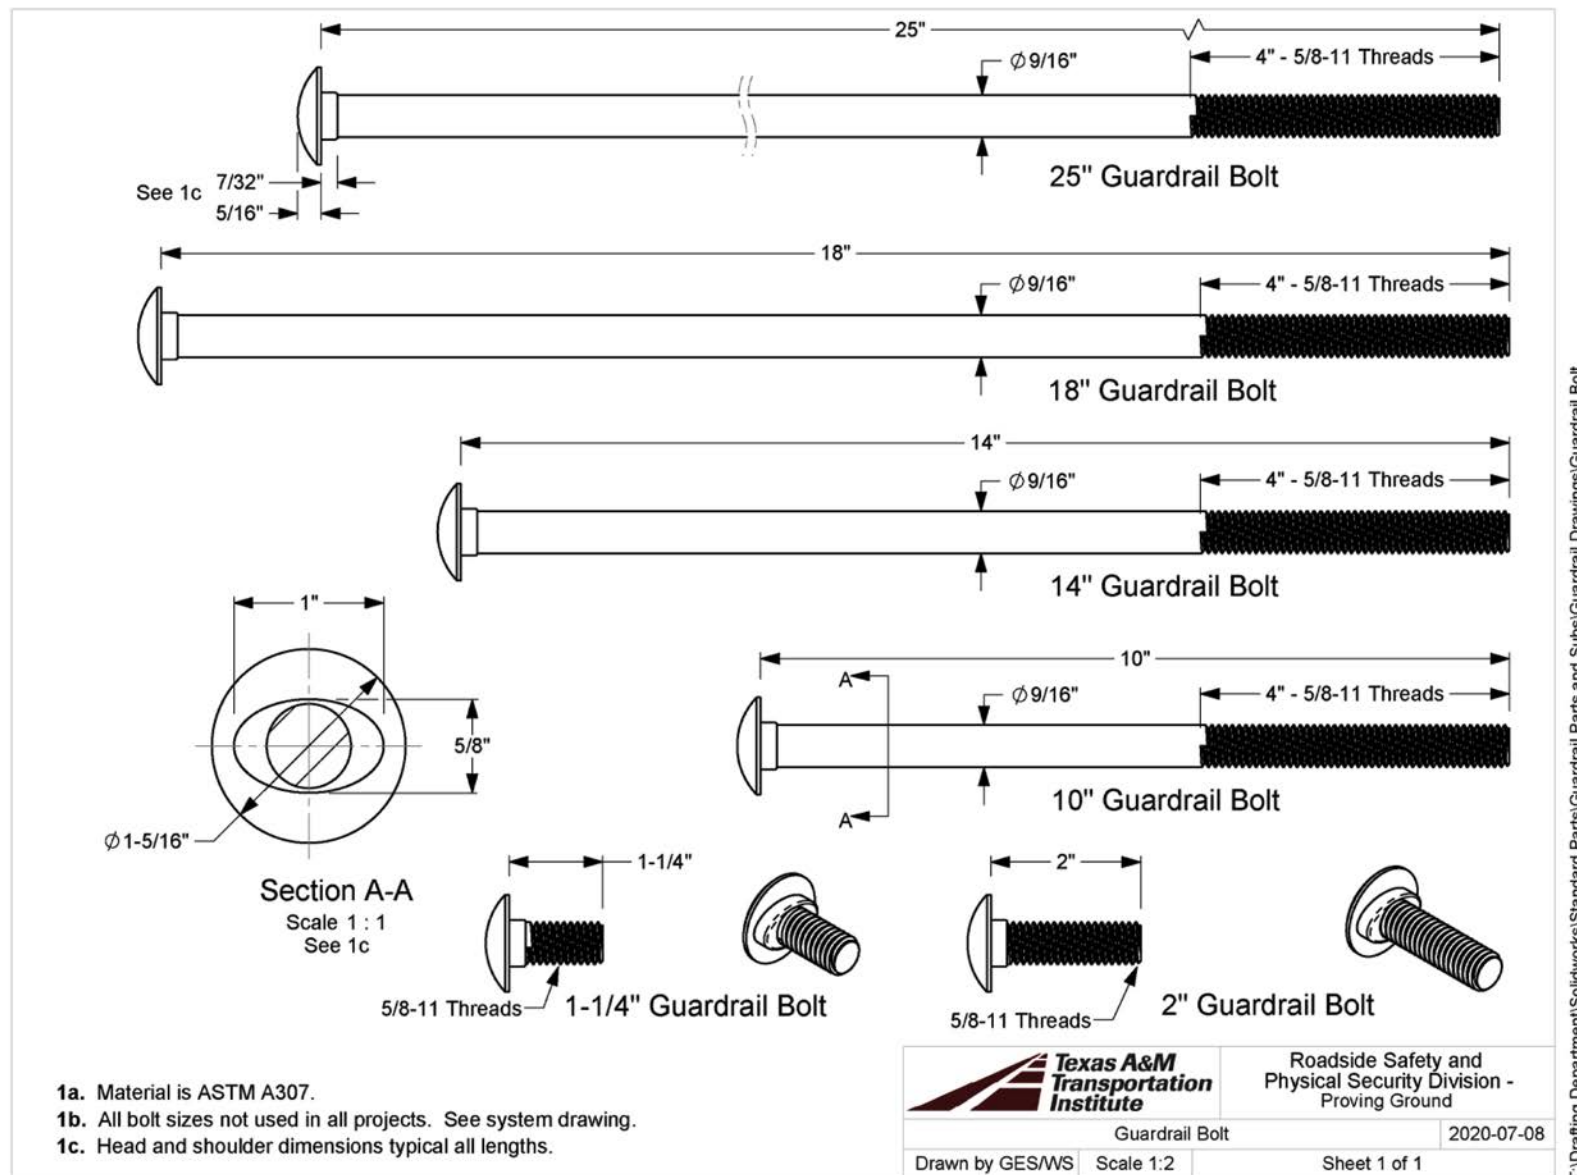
Tests 612941-02-3 and -4 guardrail bolts.
